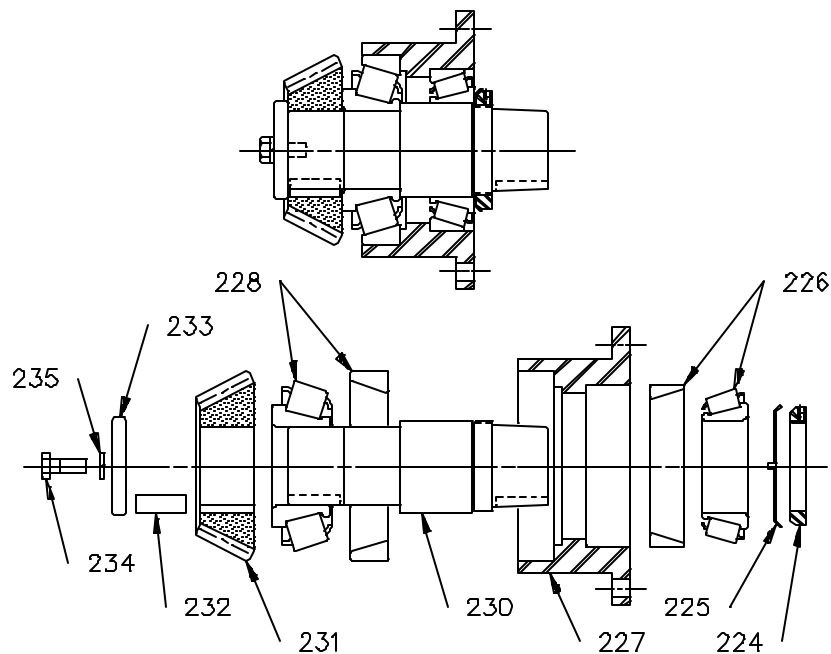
Spiral Bevel Pinion Cartridge Assembly [223]
